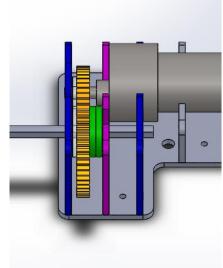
Closeup of the gearbox configuration (Top 45°view).
